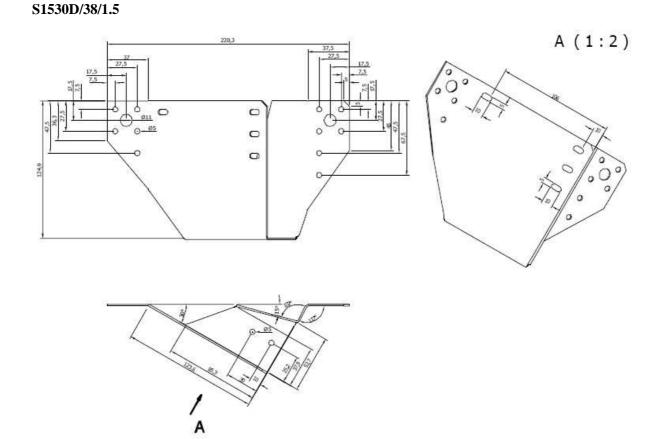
Dimensioned drawing of skewed hanger S1530D/38/1.5
